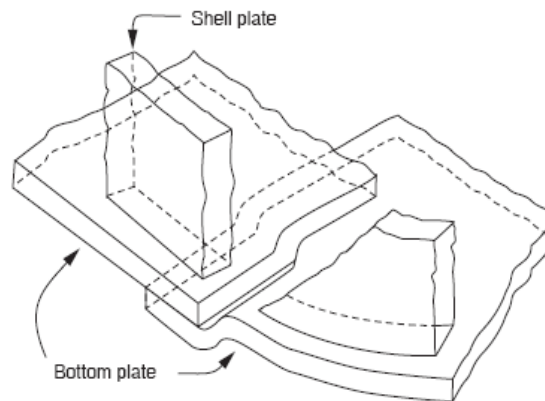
B—Method for Preparing Lap-Welded Bottom Plates under Tank Shell (See 5.1.5.4)
